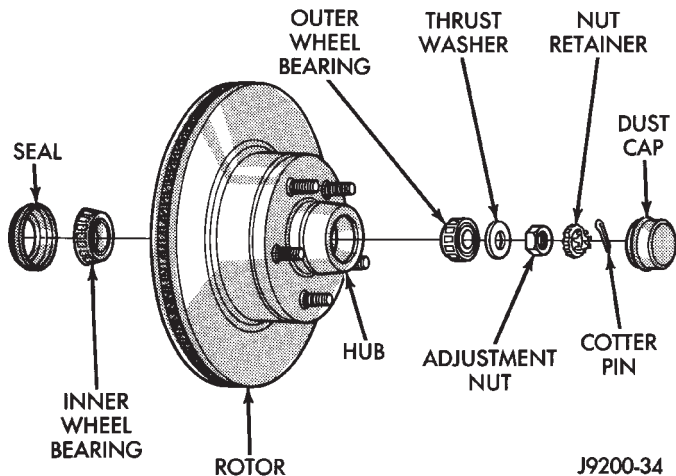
2WD Front Wheel Bearings—XJ Vehicles
